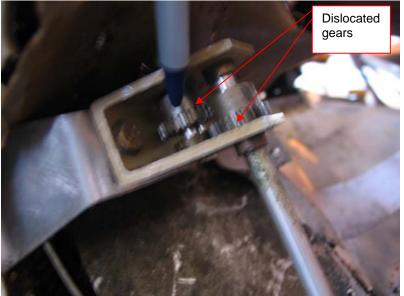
View of the fuel selector valve with dislocated gears under the cockpit floor panel.
